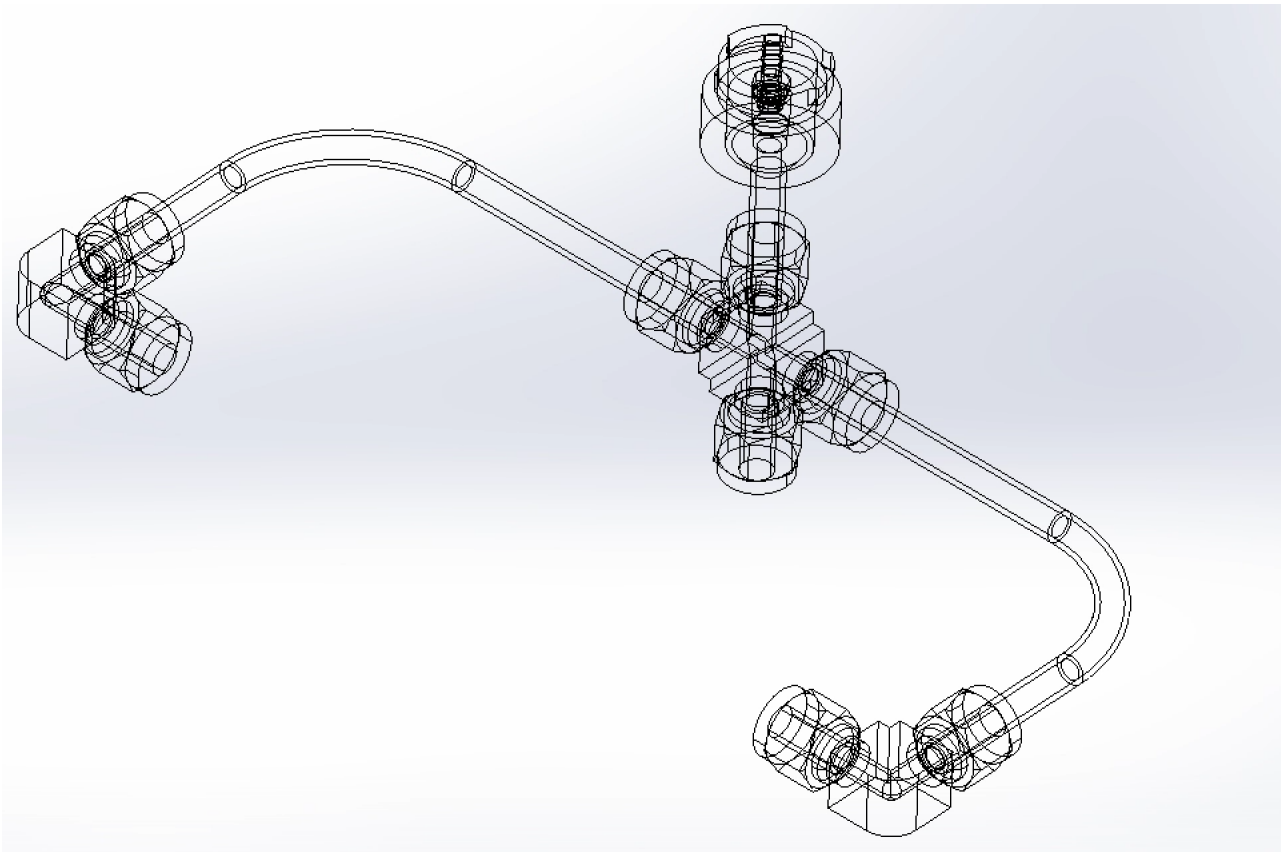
Sample Holder Assembly in wire frame view to show inner piping.
